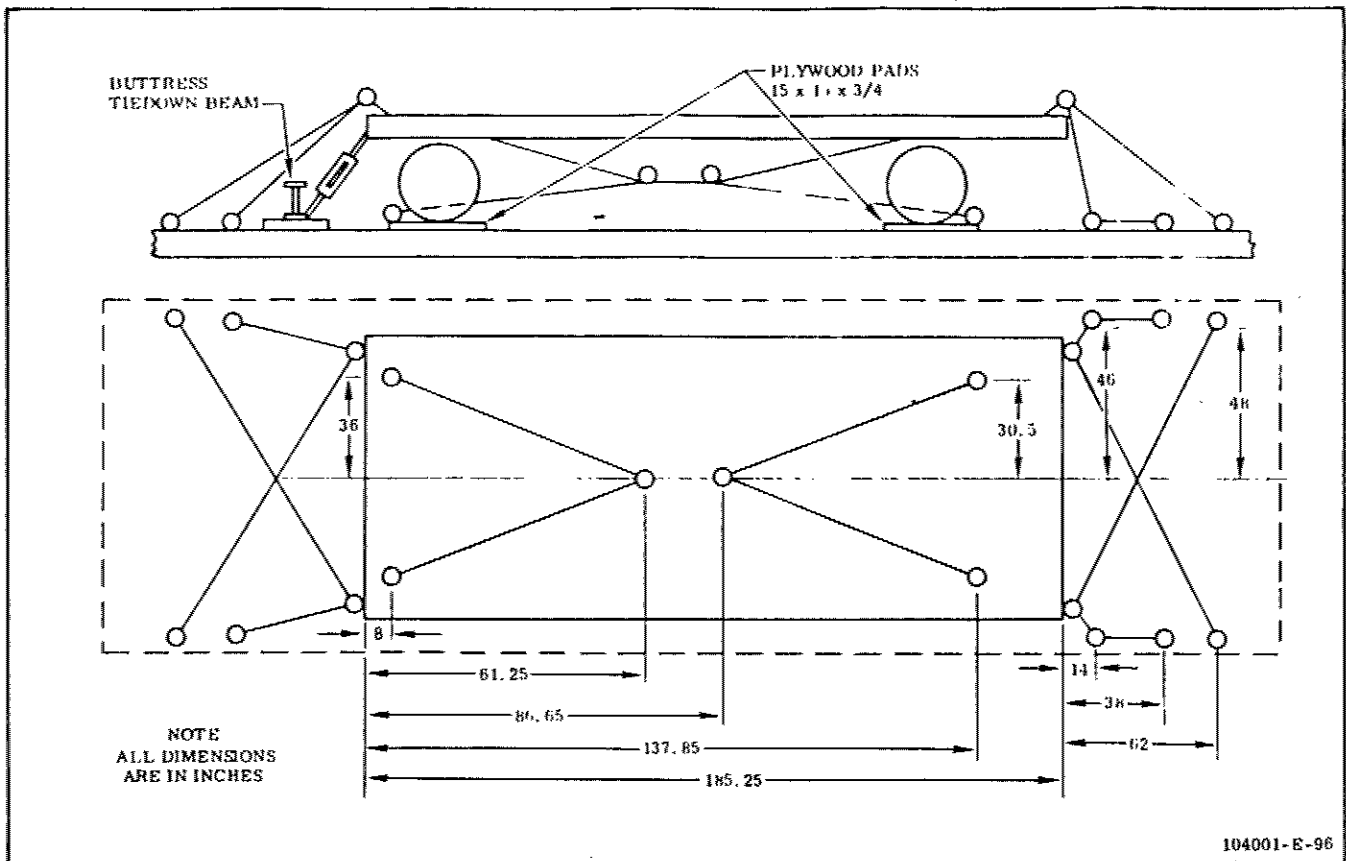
Loading Engine on Shipping Pallet (Sheet 2 of 2)
